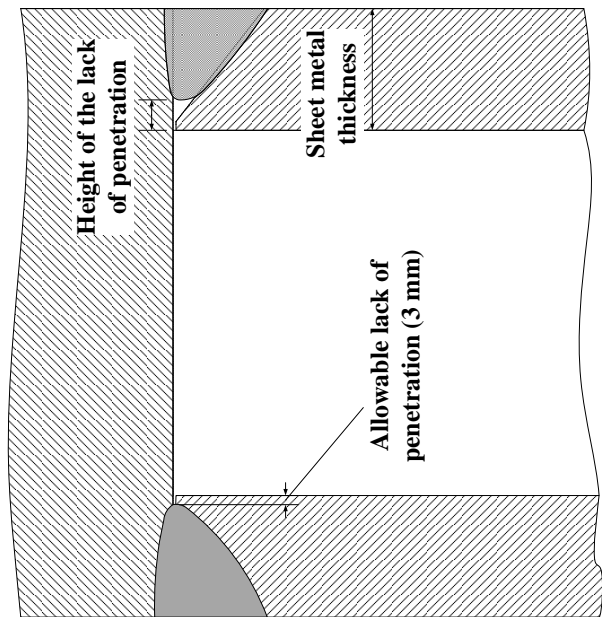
Appearance of welded joints with the lack of root penetration on the side of the upper sleeve of a guide vane apparatus vane
